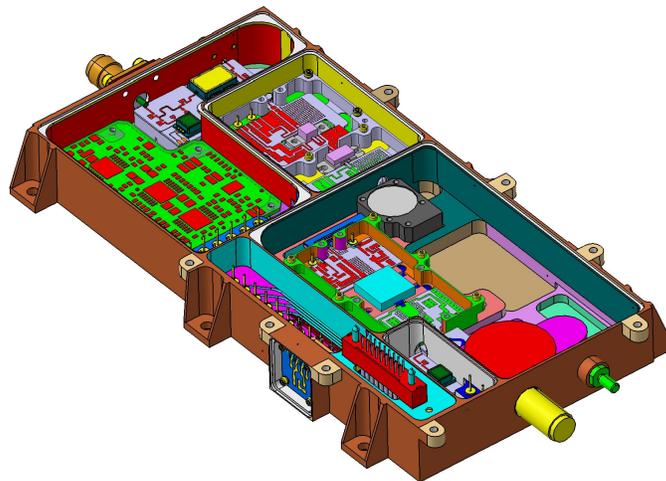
CAD Layout of Engineering Model 80W S Band RF Tray
